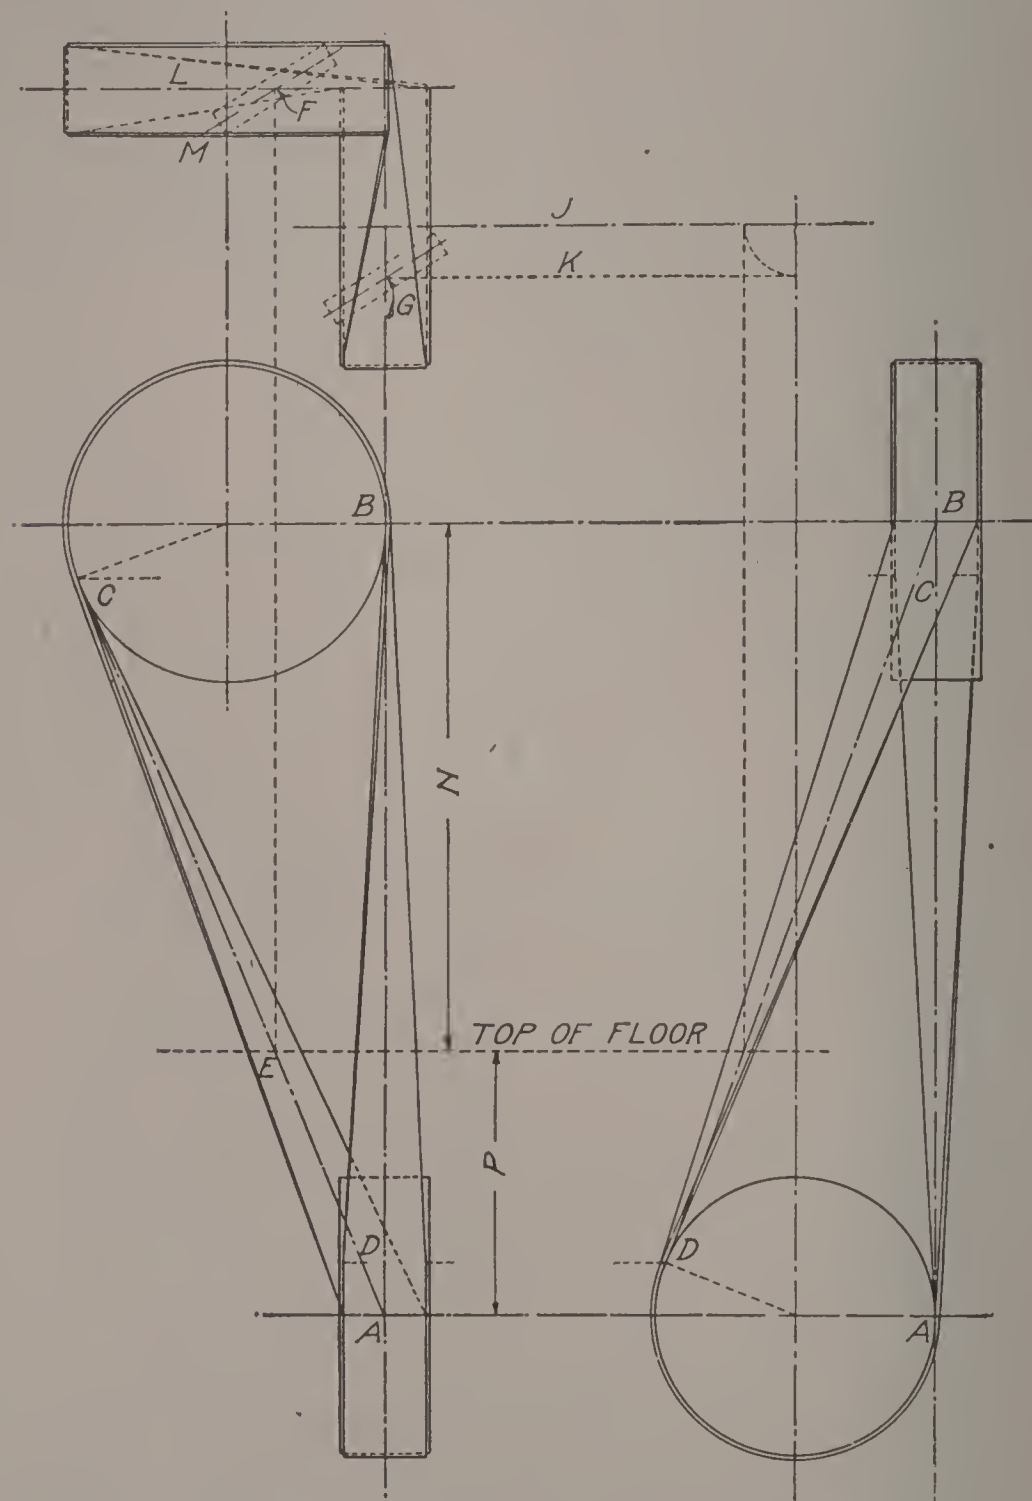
Locating Belt Holes for Quarter-Twist Drive
